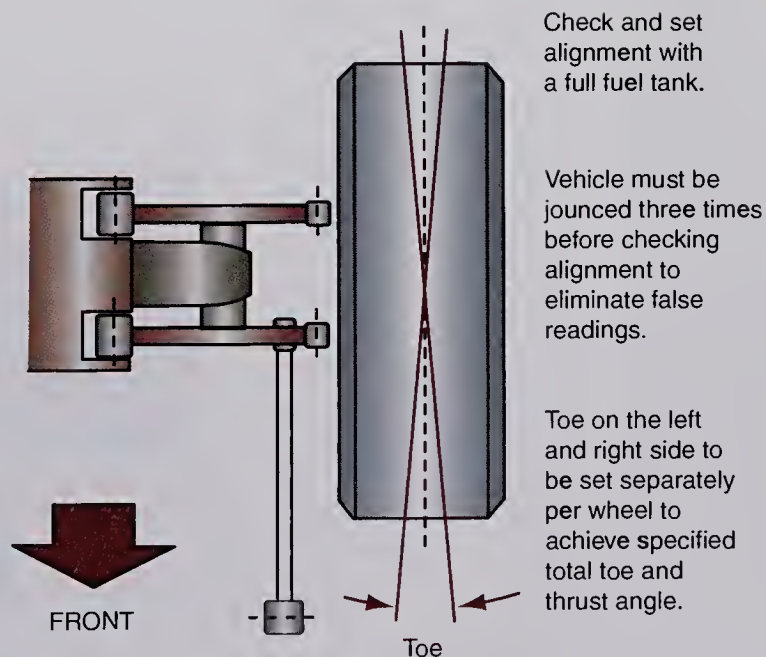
Moving lower rear control rod position to adjust rear wheel toe.
